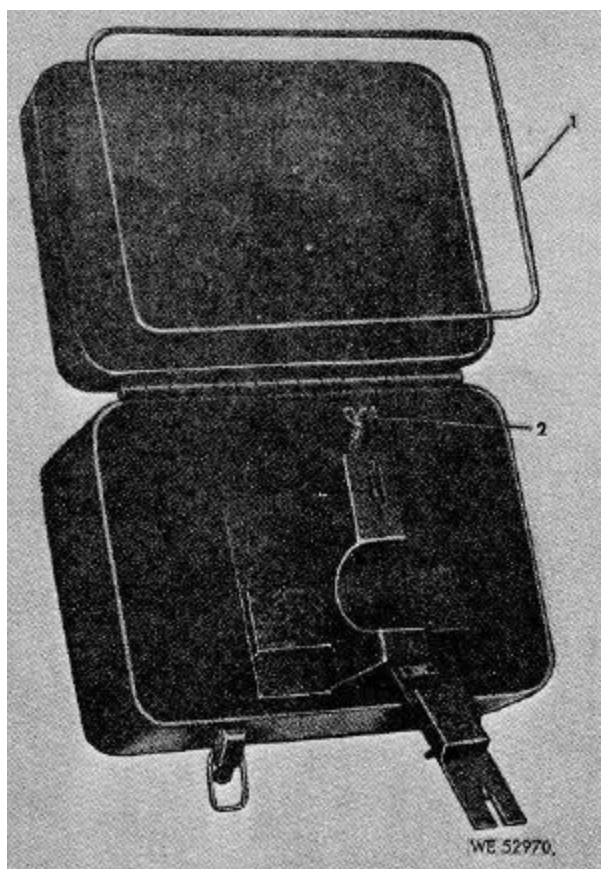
Chest, packing M27, 7691521-partial exploded view.
